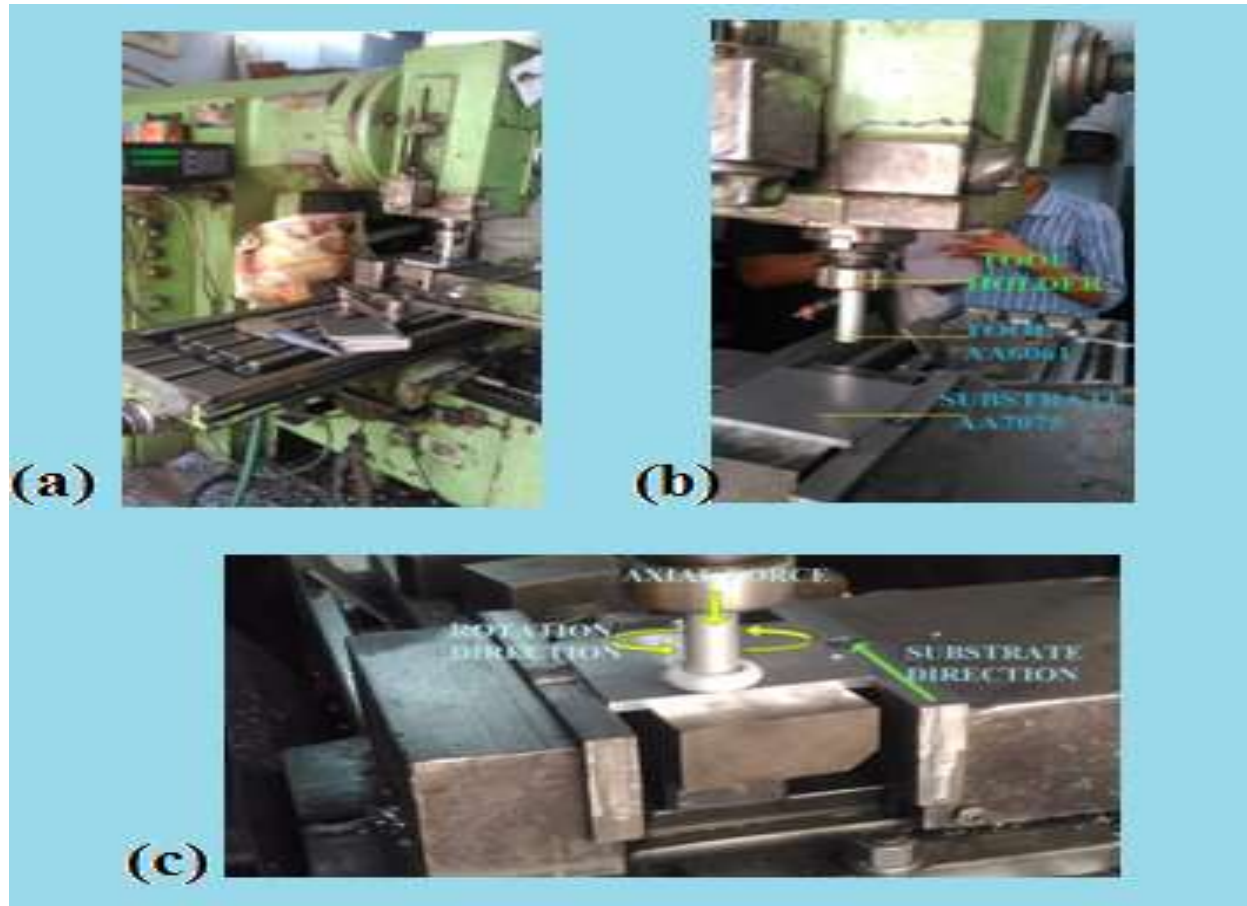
(a) HMT FN 2V Milling Machine (b) Arrangement of Rod and Substrate and (c) During Coating Process
